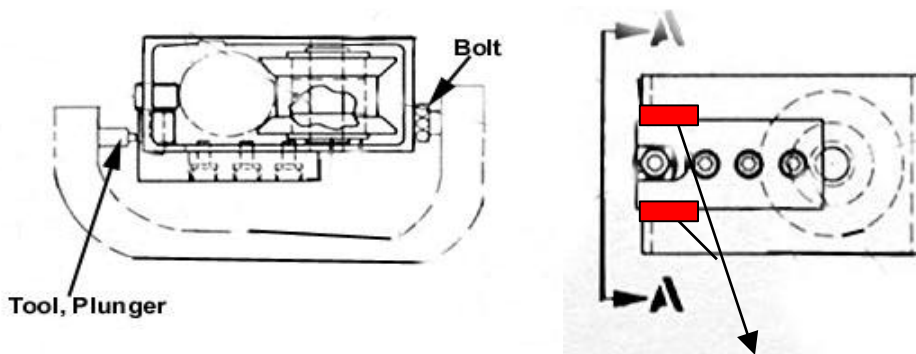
Bearing Tool Placement Keep the gap even and bearing straight
